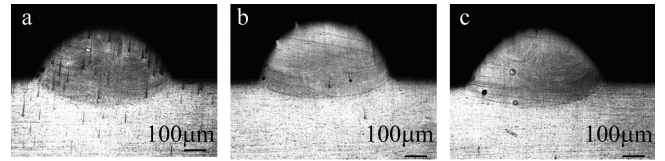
Weld section in different distance between laser beam and wire
